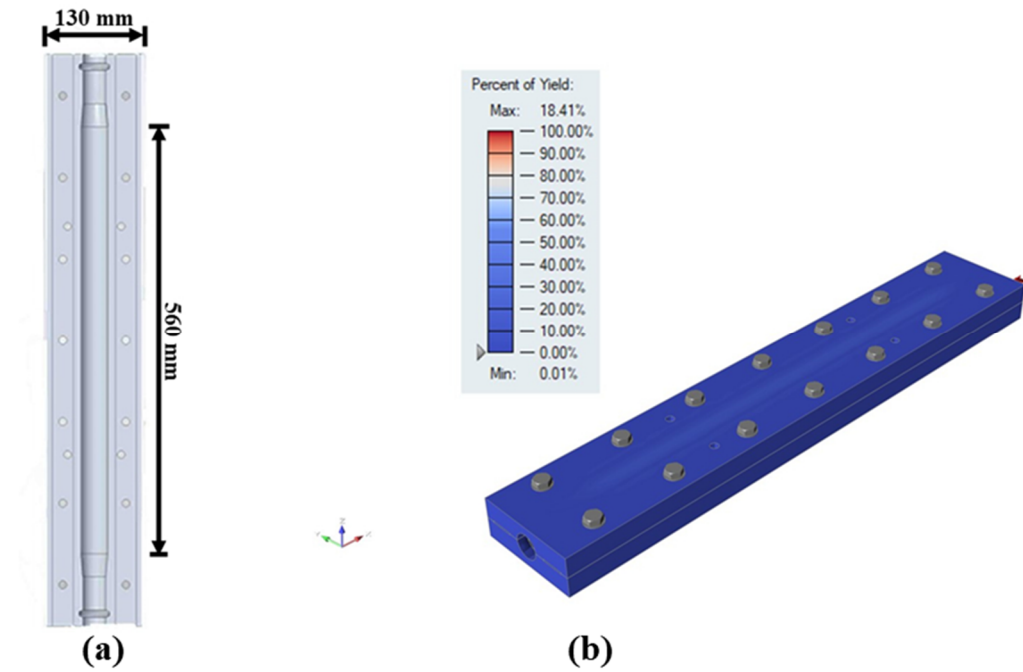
(a) CAD model showing half tool with mould cavity for producing hollow tubular parts using BIM and (b) Stresses predicted by static thermo-mechanical simulation of the tool subjected to 250 °C with 20 bar internal pressure.
